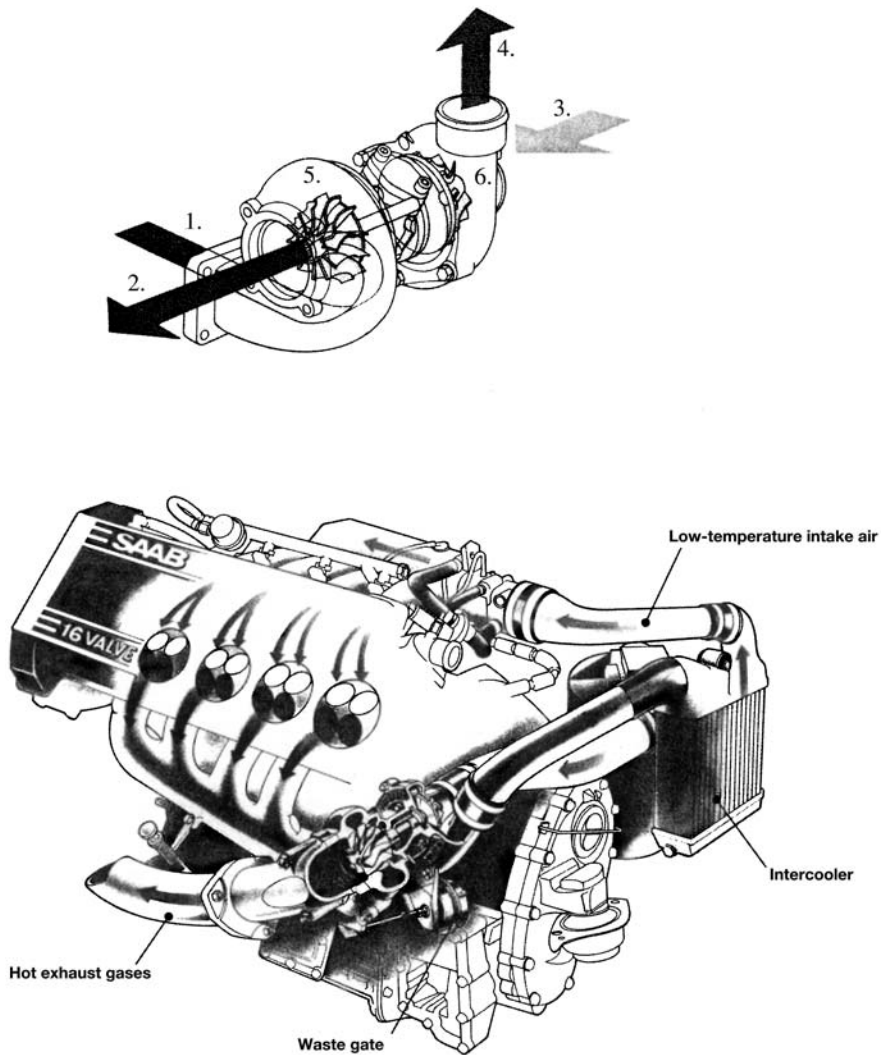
Typical turbocharger installation on a spark ignition engine. After the air has been compressed in the turbocharger, it is cooled as it flows through the intercooler. The wastegate is a valve that controls the boost pressure. (Courtesy Saab Automobile AB.)
